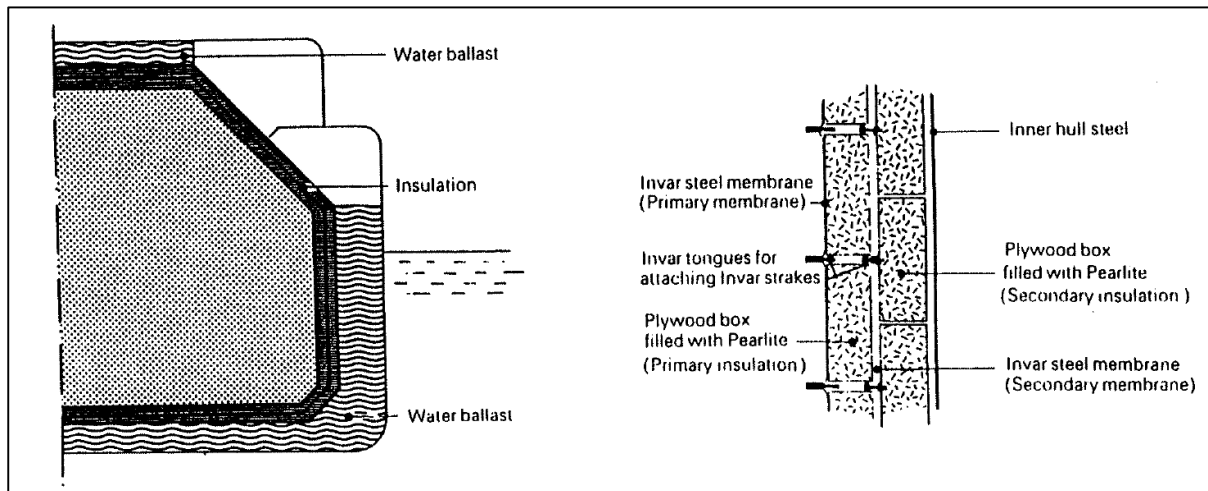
Details of tank construction on membrane containment tanks (Zuidgeest, 2002)
